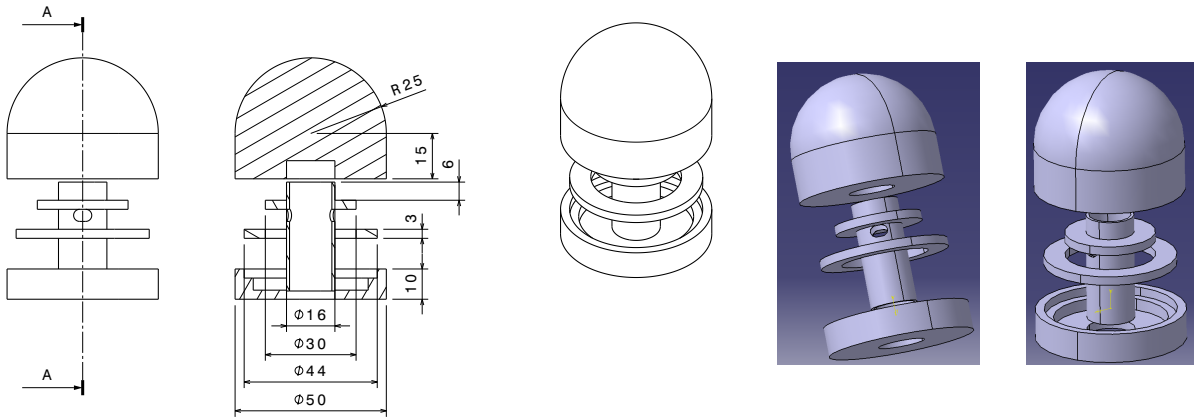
Detailed geometry and CAD rendering of the 2D hemispherical samples and holding plug.
